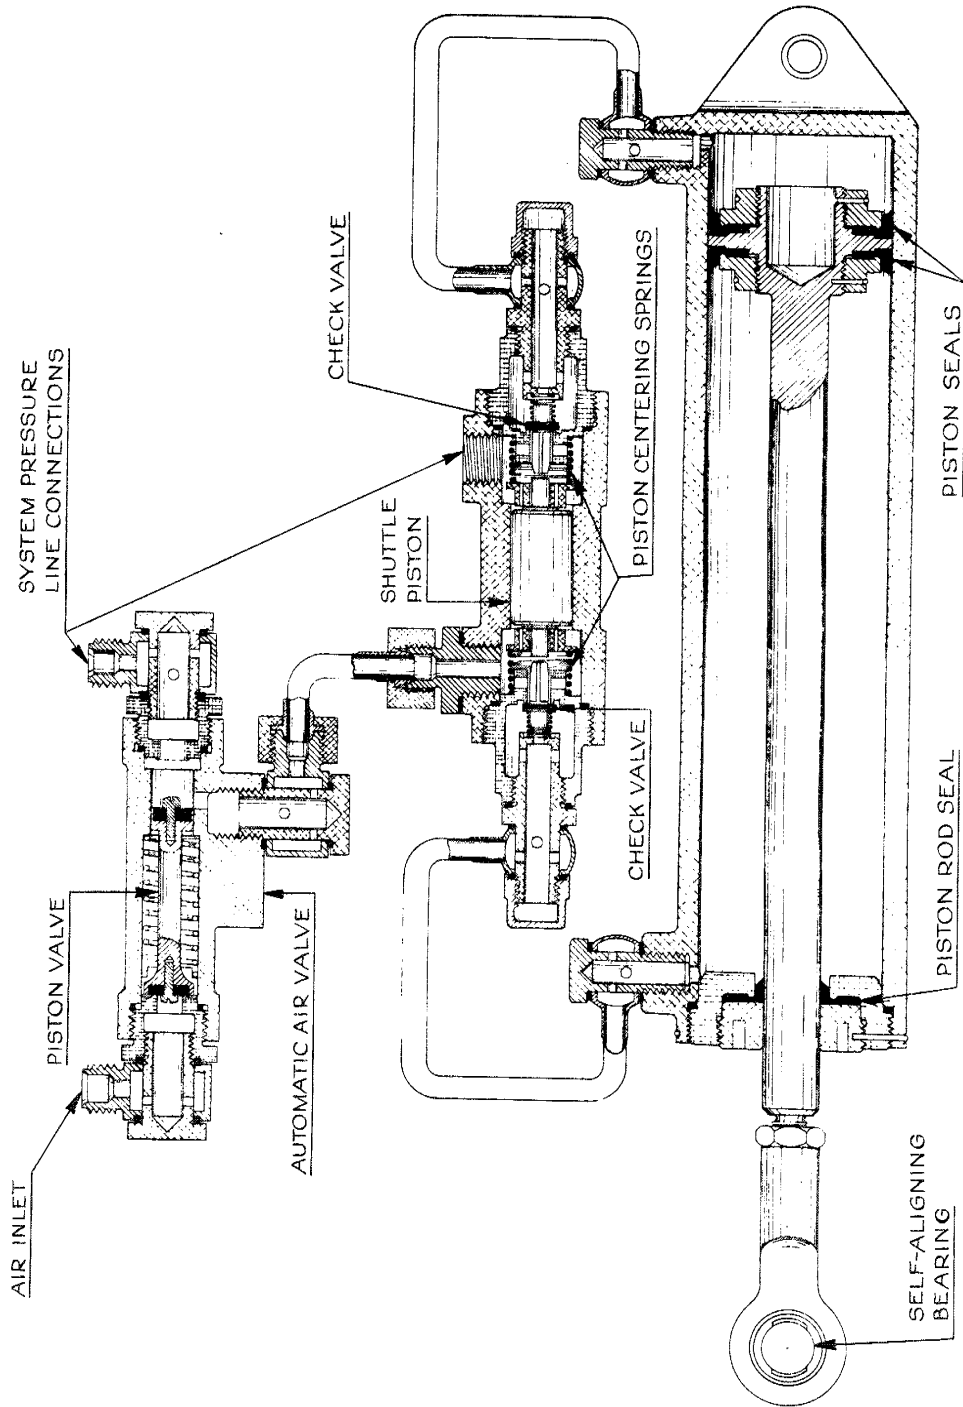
FLAP ACTUATING CYLINDER CROSS-SECTION
